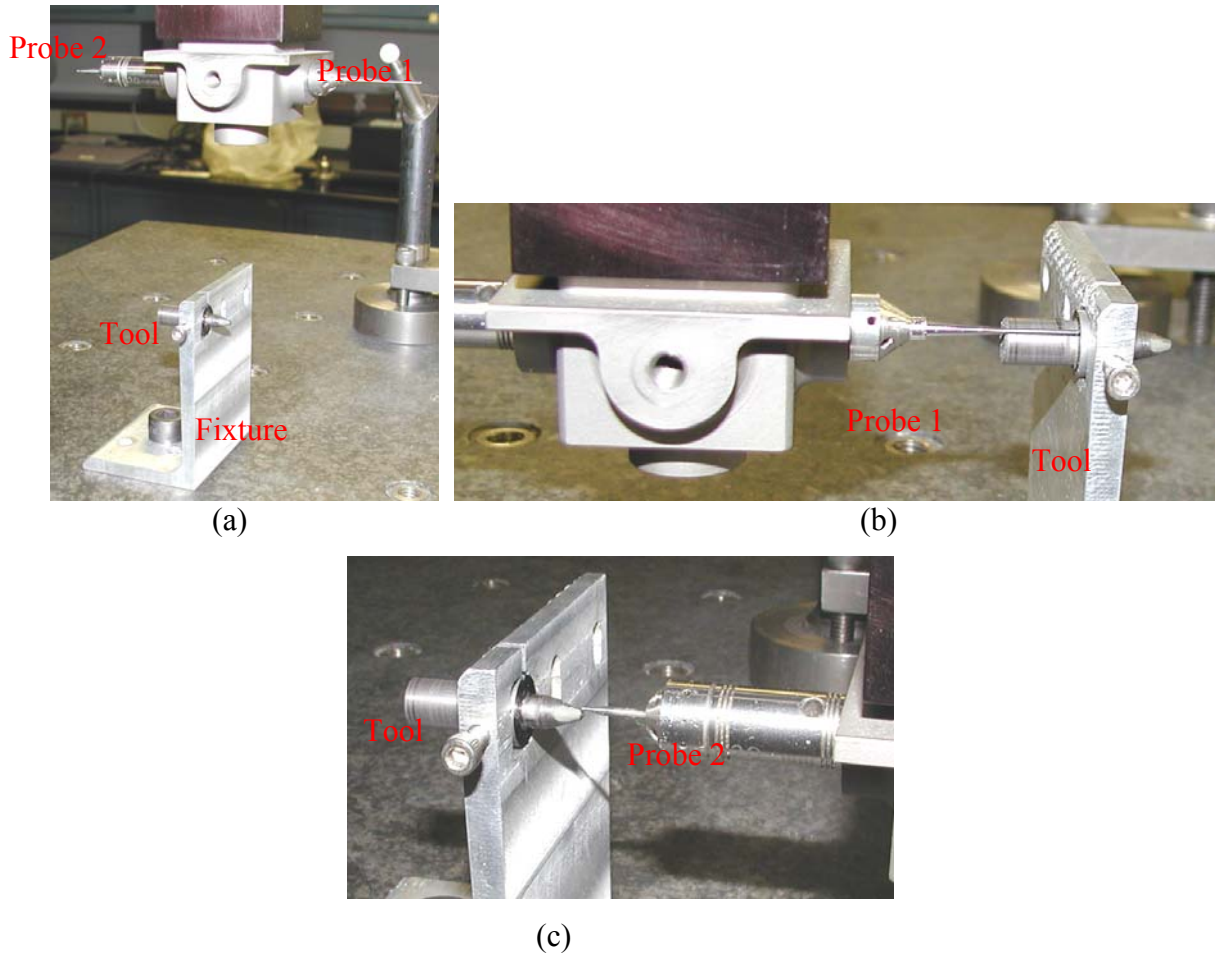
CMM for tool wear measurement: (a) tool, tool holder, and CMM scanning head with probes 1 and 2, (b) probe 1 measuring the axial datum, and (c) probe 2 performing axial scanning of the tool conical region.
